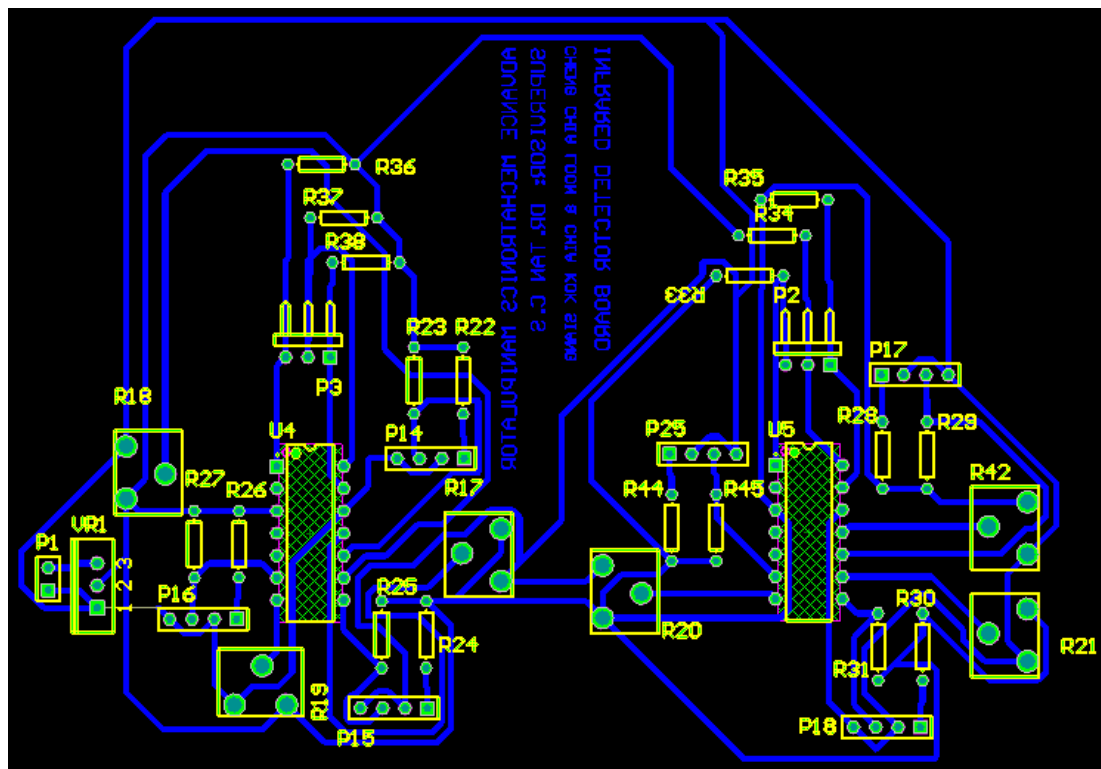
PCB design in Altium Designer, blue colour indicates connection routes, yellow colour indicates components and green colour indicates components pin holes
